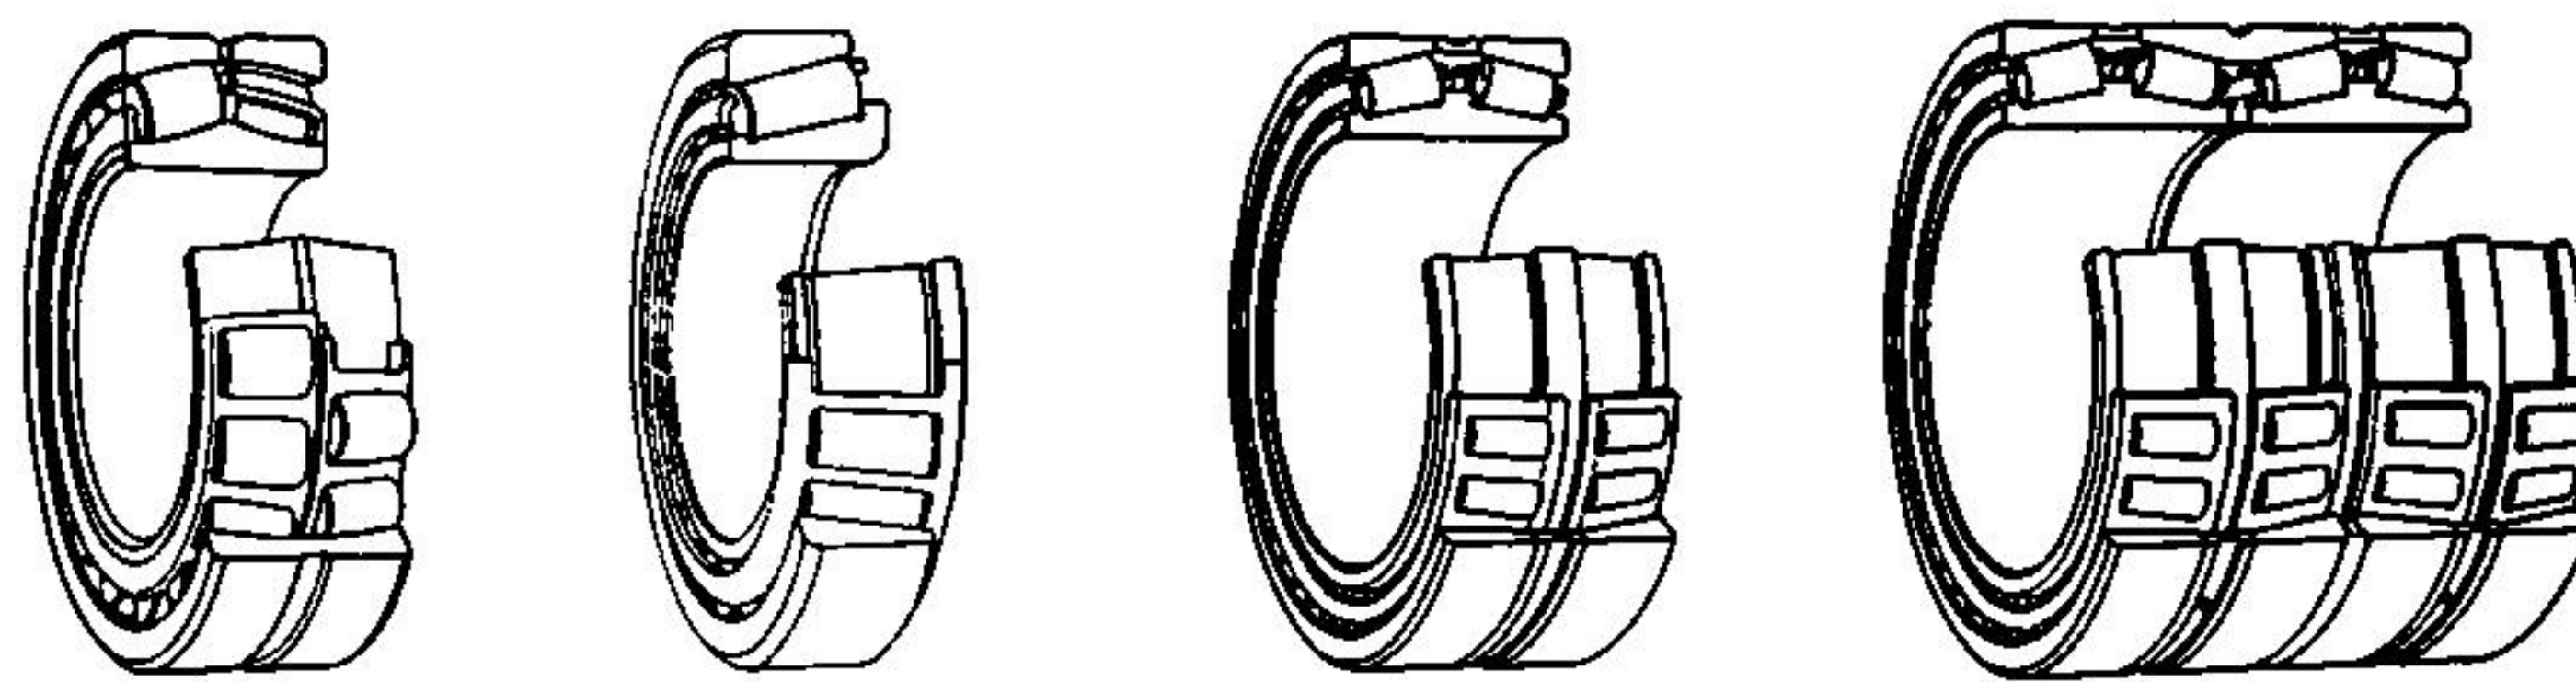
(Continued) (c) Roller bearing types for radial and axial loads combined.
